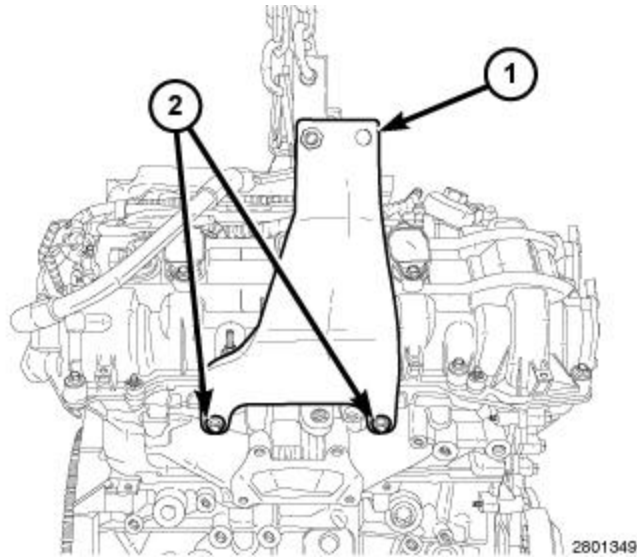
Passenger Side Engine Lifting Bracket & Bolts
